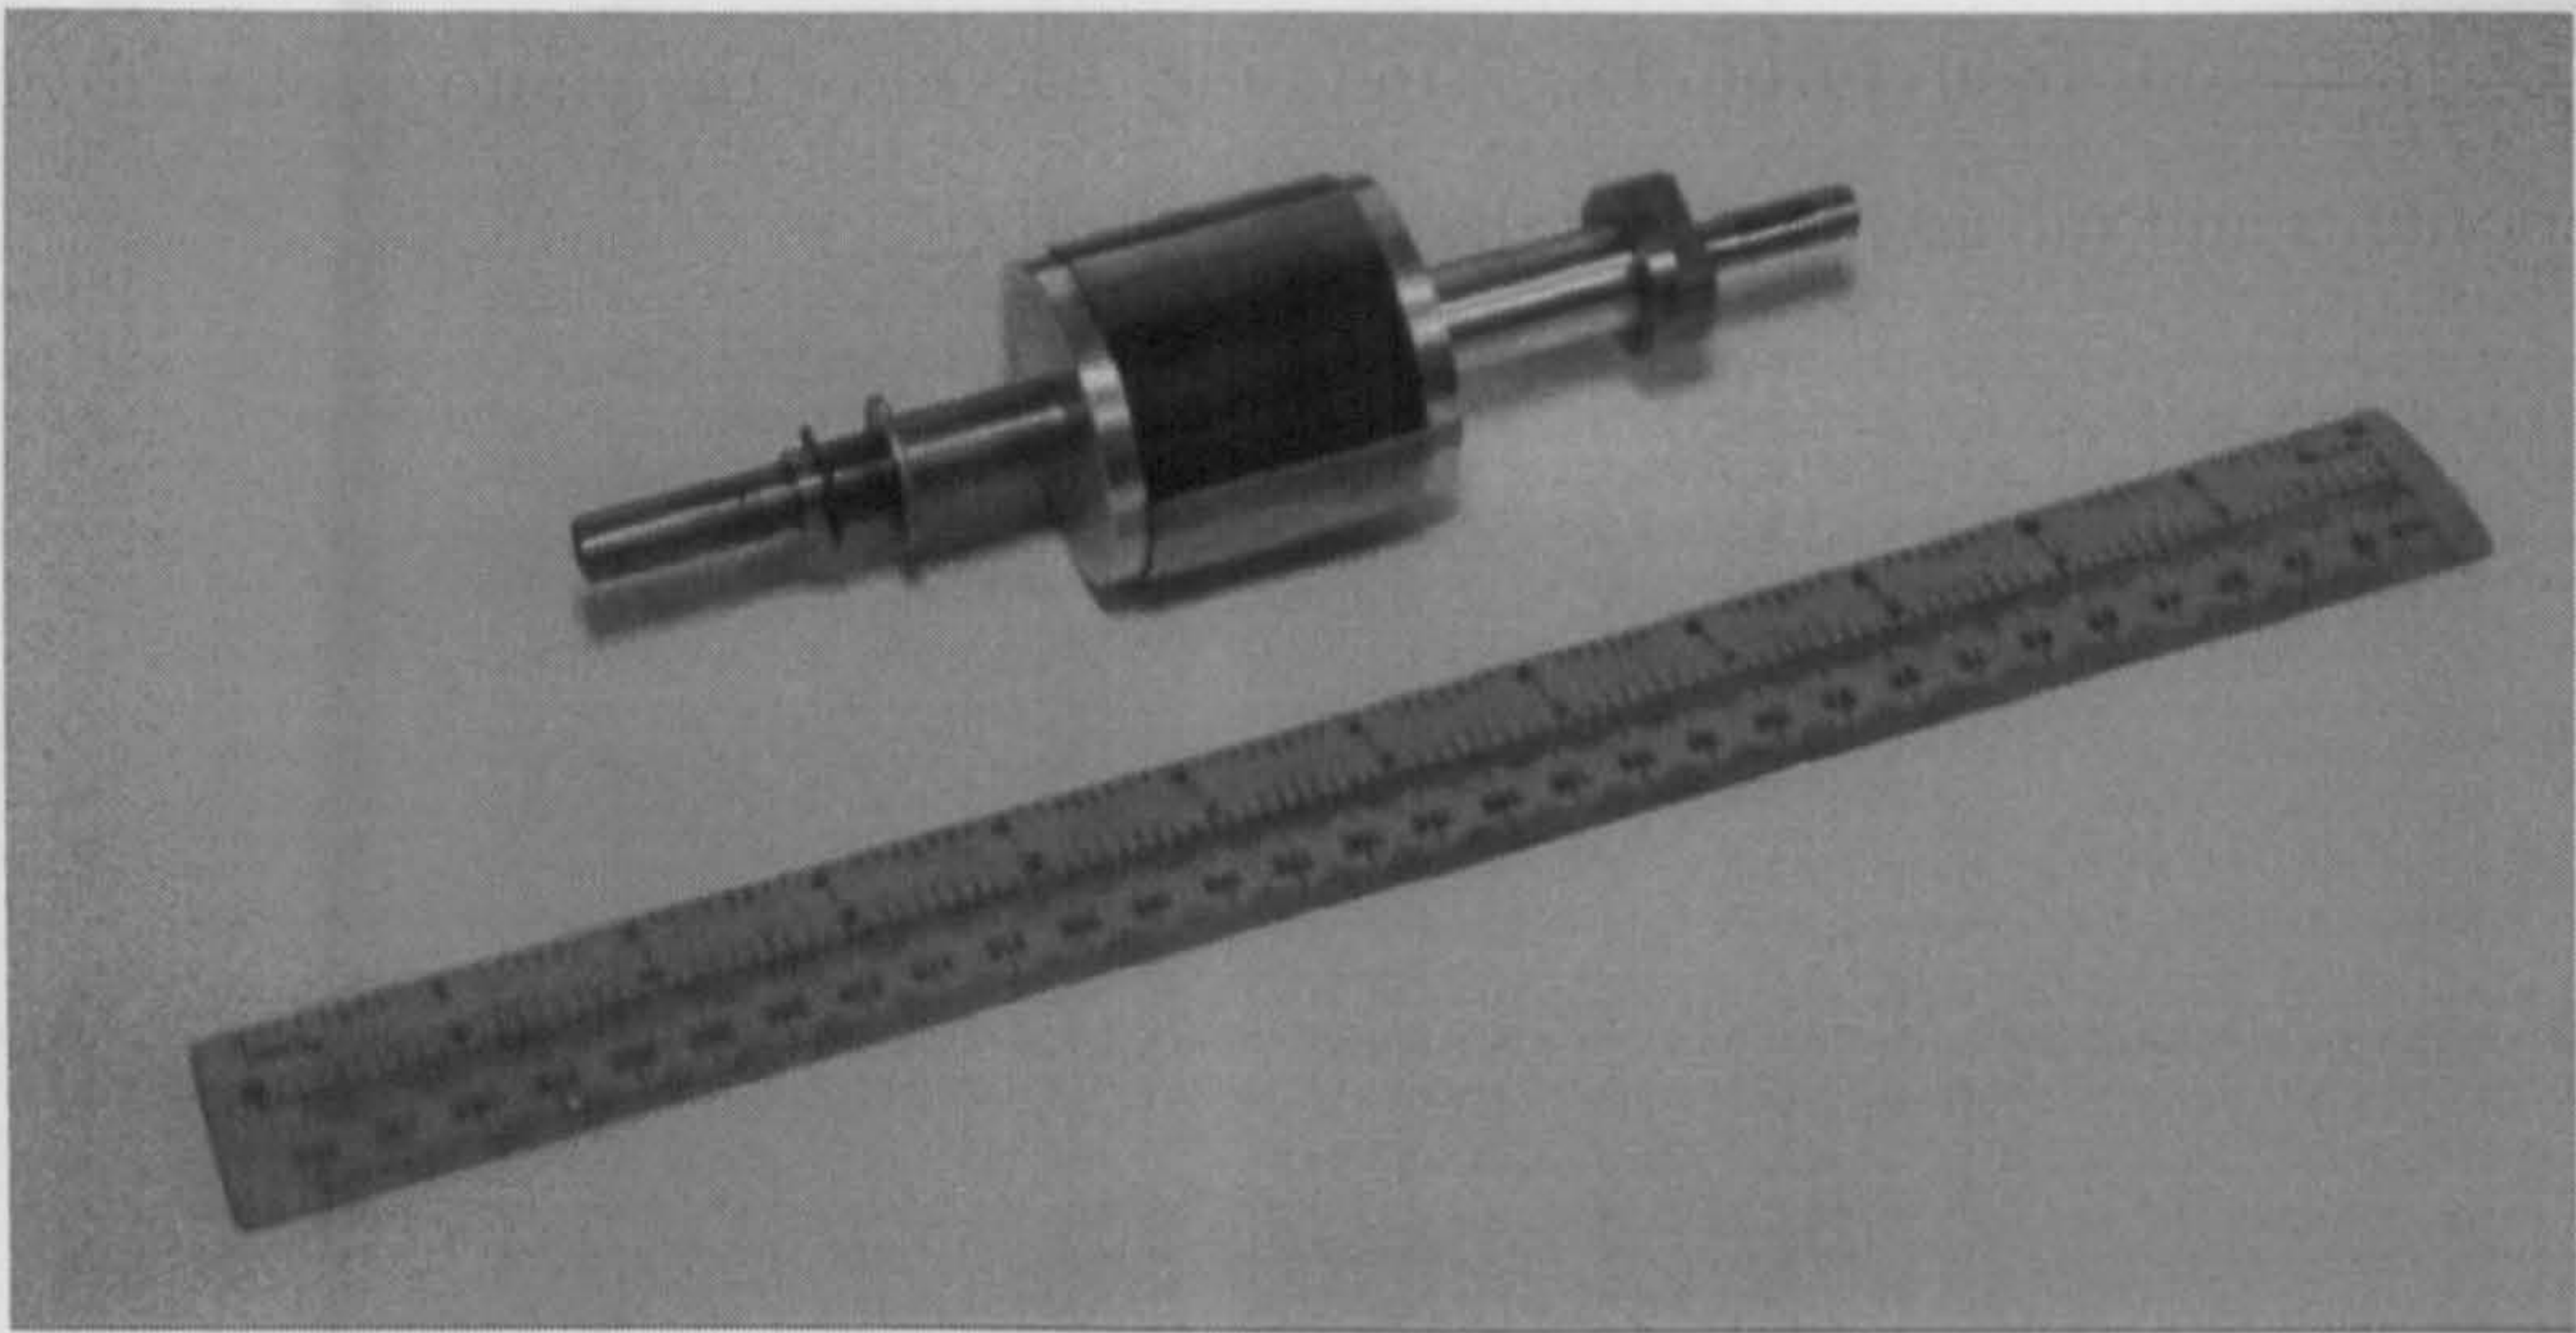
Prototype FRG variable reluctance rotor assembly.
